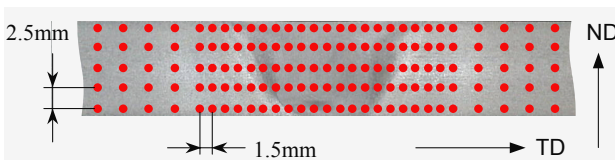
Macrograph of a friction stir weld, showing the matrix of points measured.
